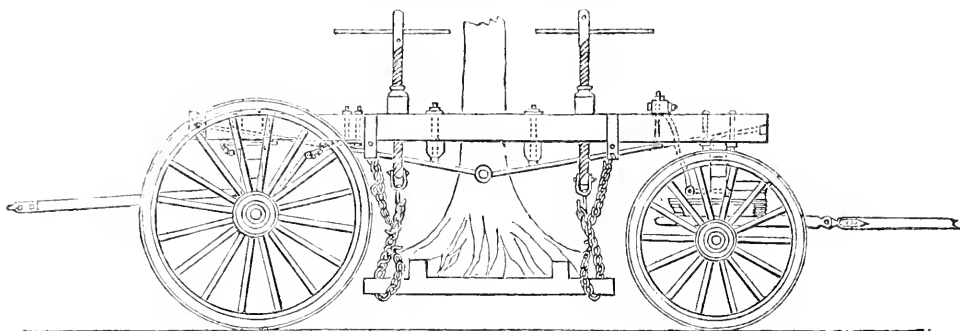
SIDE ELEVATION OF TREE LIFTER.
